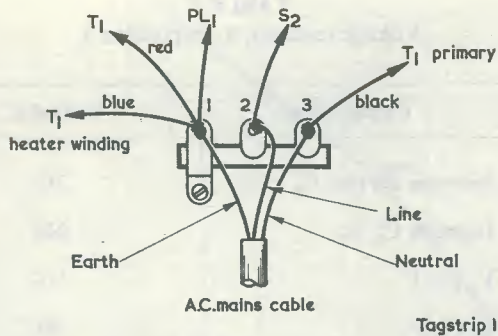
Showing the 3-core a.c. mains input cable soldered to tagstrip 1.
